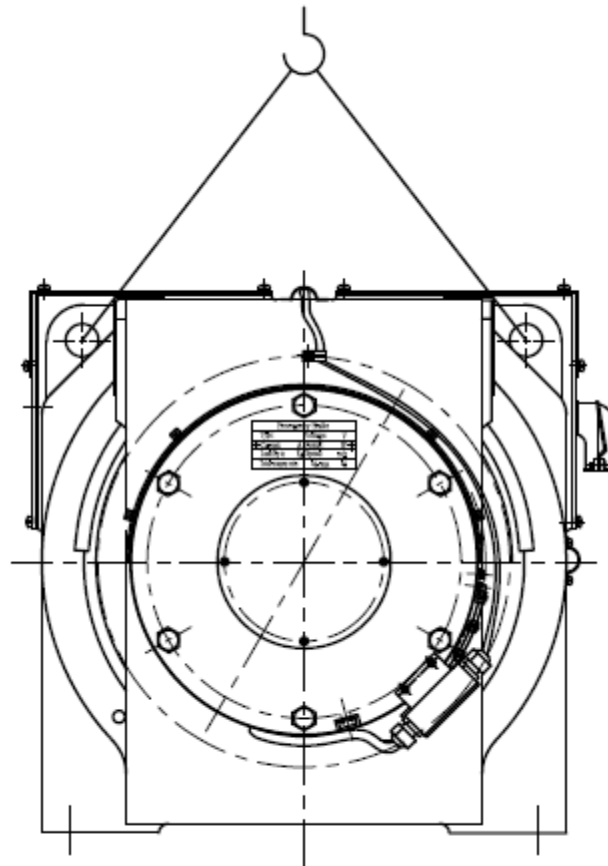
TSM/TMGL1 Machine Recommended Hoisting Methods
